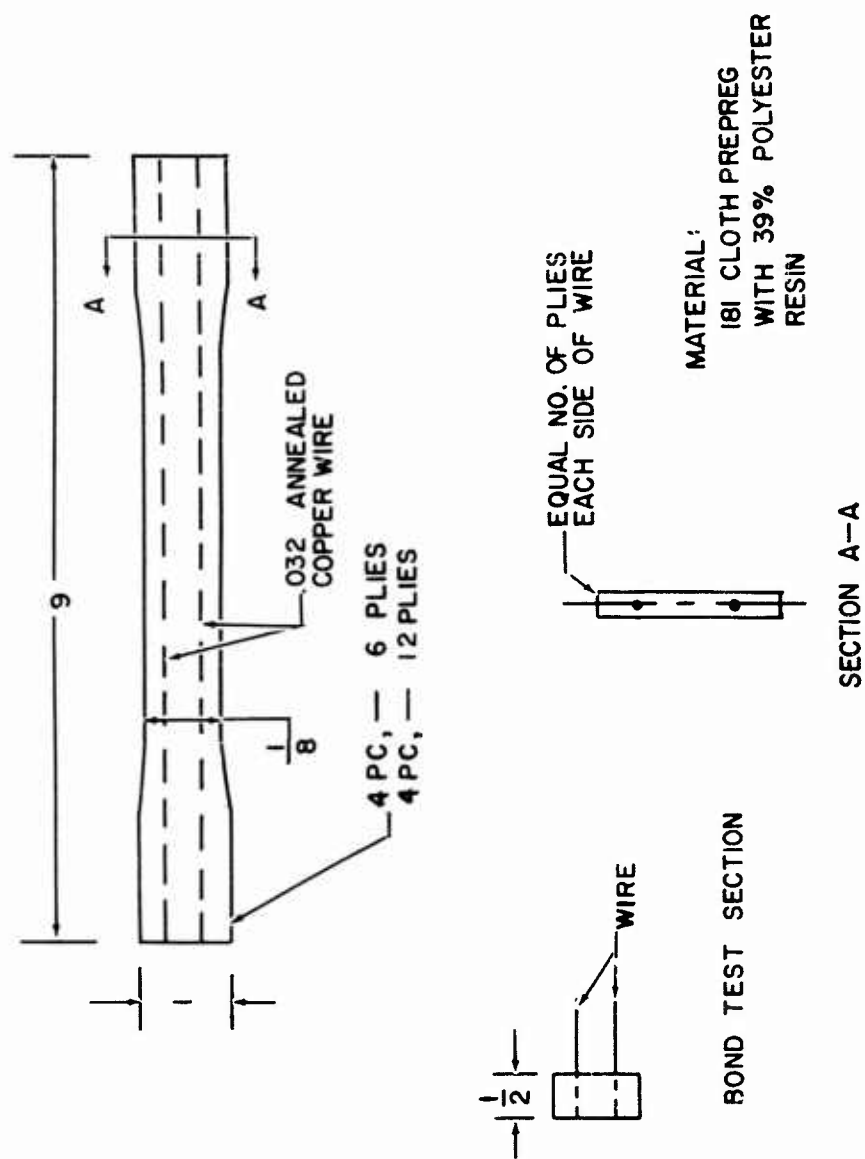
WIRE IMBEDMENT TEST SPECIMEN
